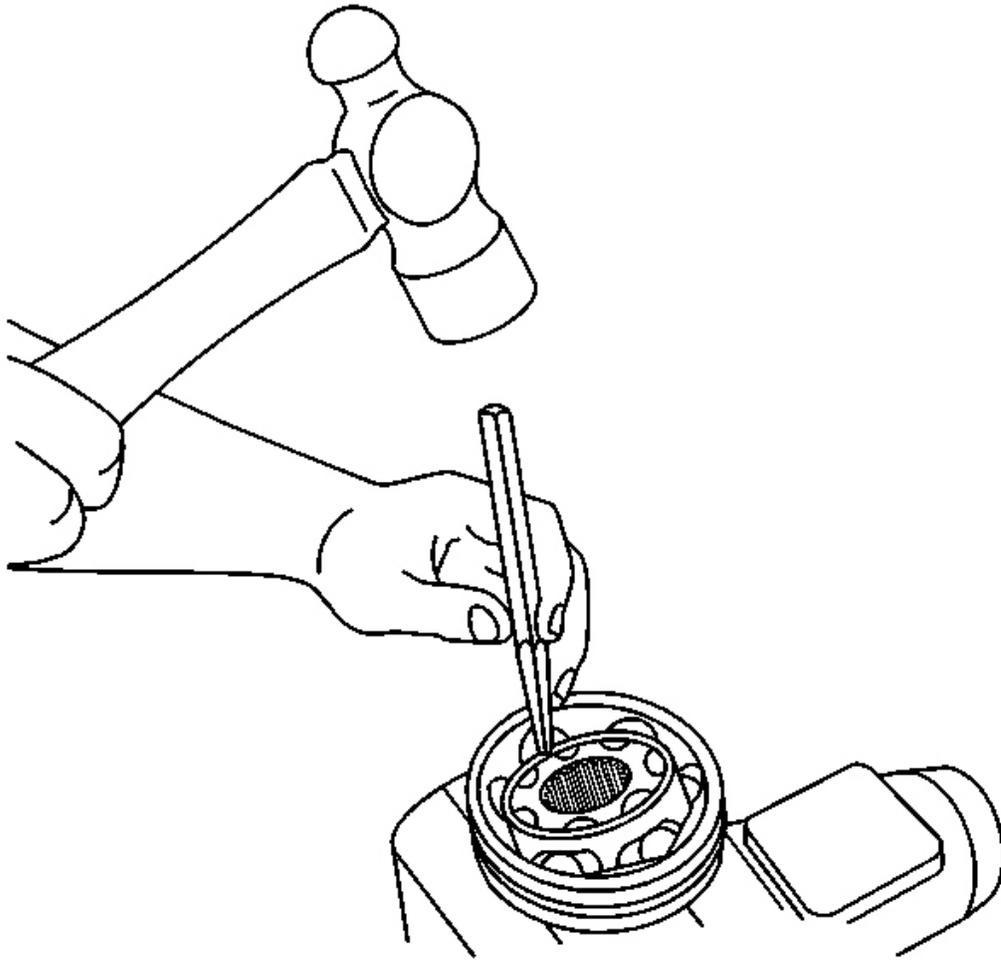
Using A Brass Drift And A Hammer To Position Ball Cage
